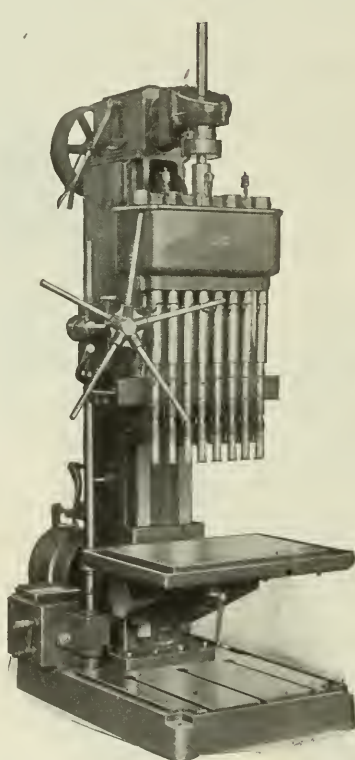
"Natco" No. 40 Straight-line Drilling Machine
